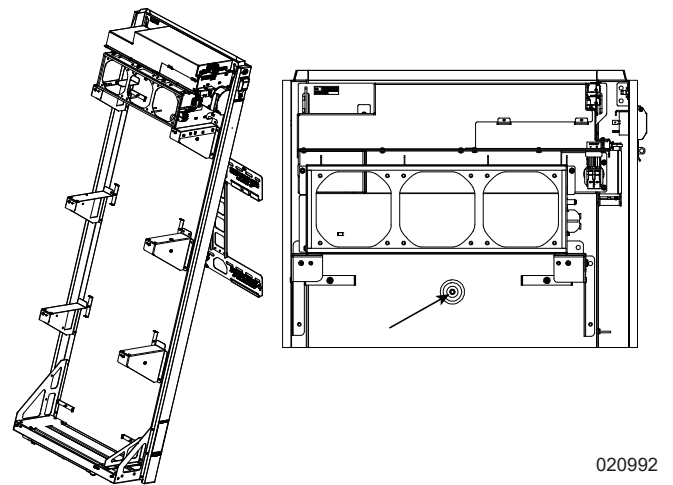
Hanging the Battery Cabinet and Fastening to the Wall
